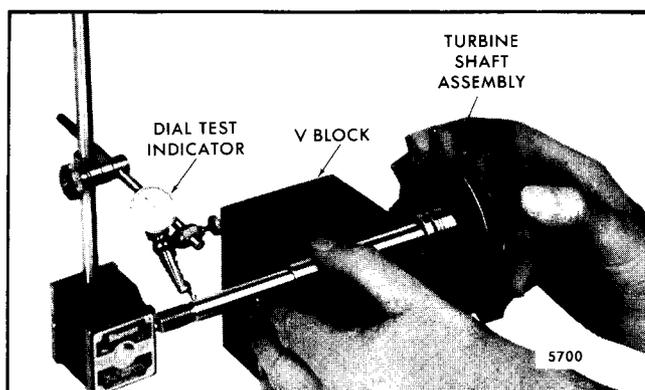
Measuring Concentricity Between Large and Small Turbine Shaft Diameters
